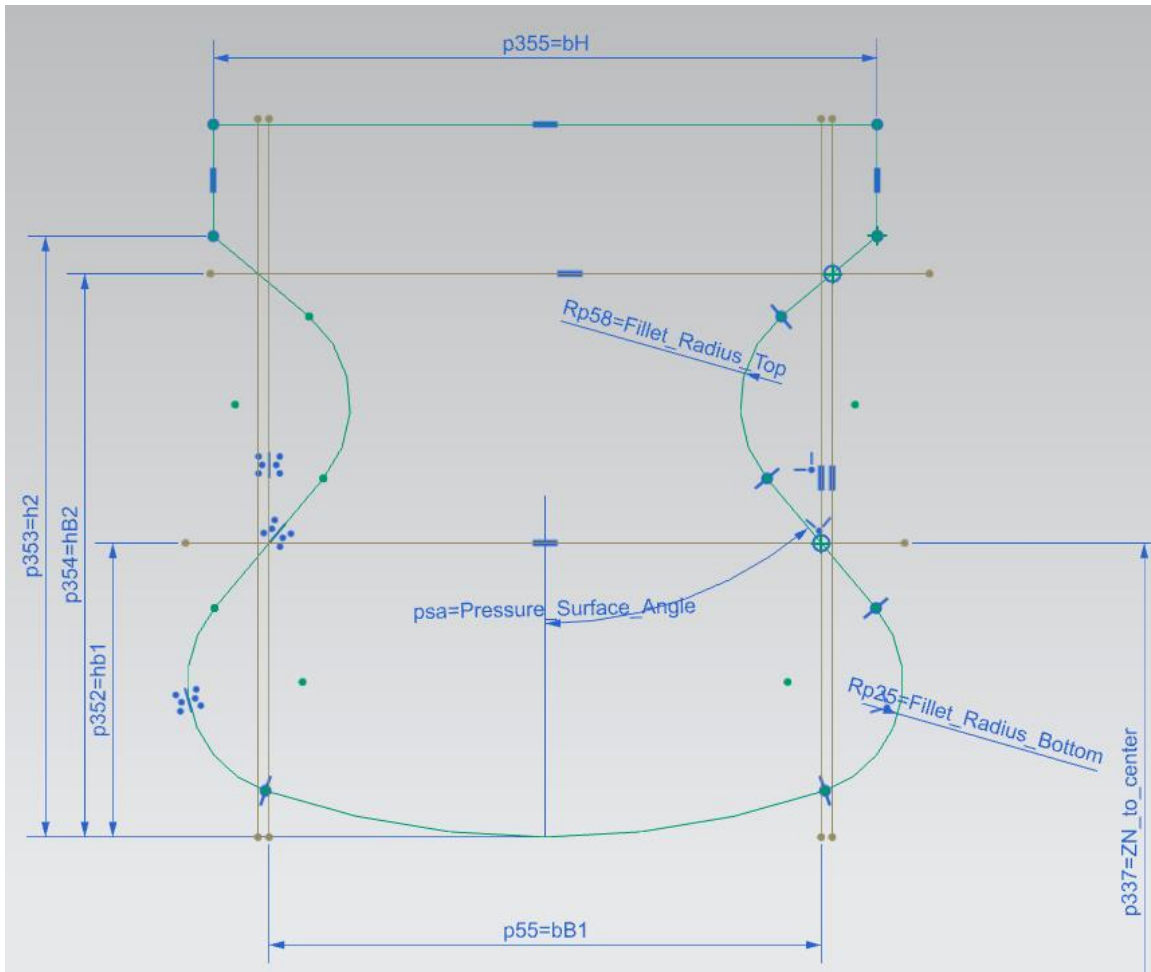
The sketch used for the cross section of the groove showing relevant controlled dimensions.
